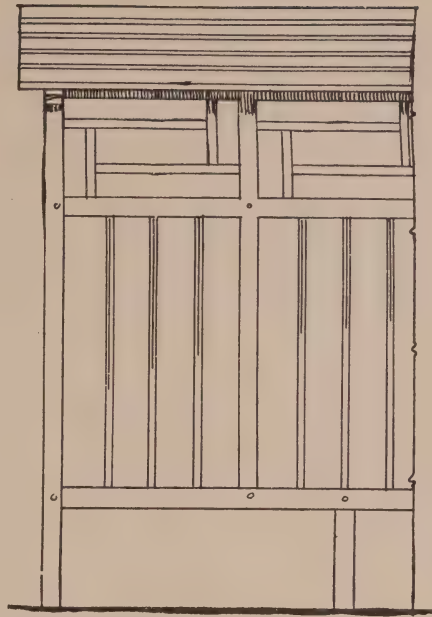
Part Back Elevation of Hooded Seat with Alternative Arrangement of Bars at Top
